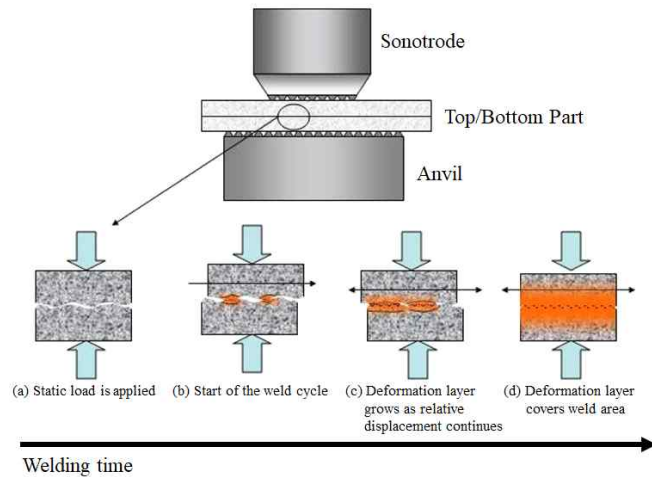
Weld development and growth of heat sources at the weld interface^[10]
